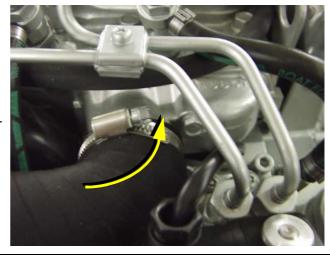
Combustion Chamber Intake Elbow
